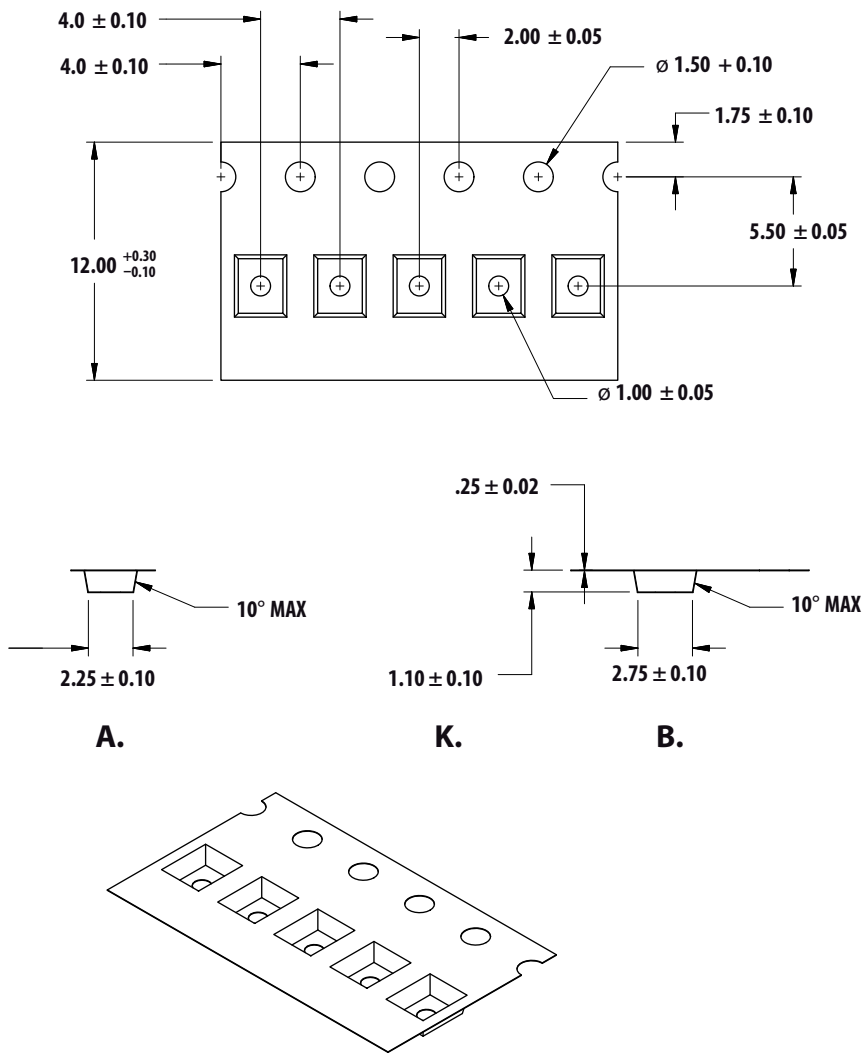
SMD Tape Packing (Dimensions for actual tape carrier may vary slightly)
